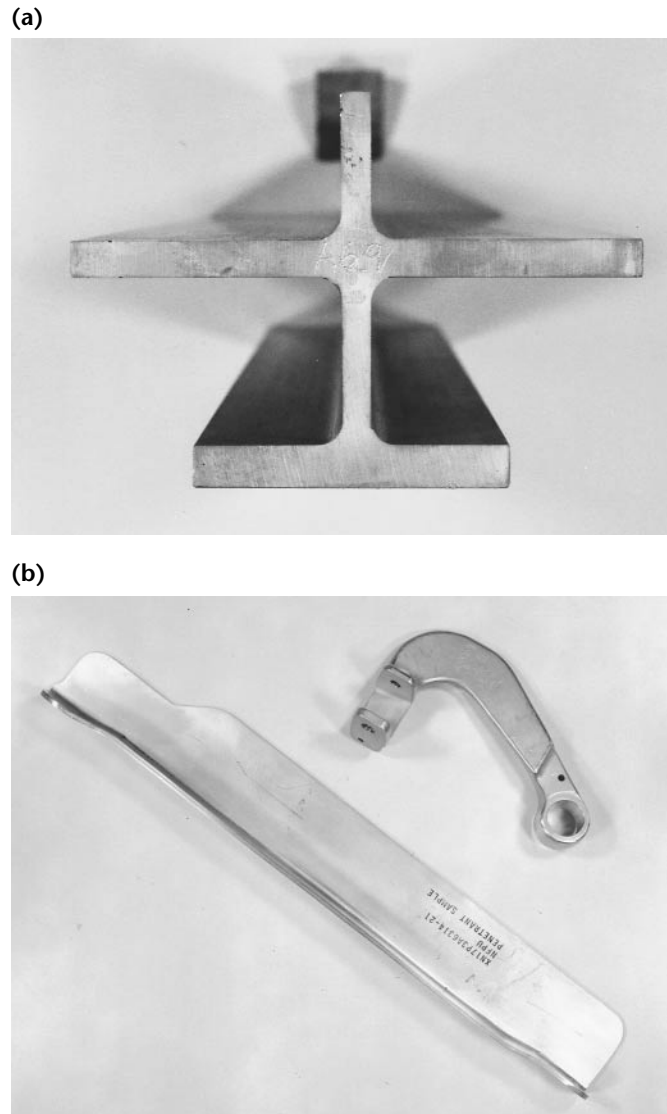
Test specimens: (a) specially made extrusion; (b) production parts.
